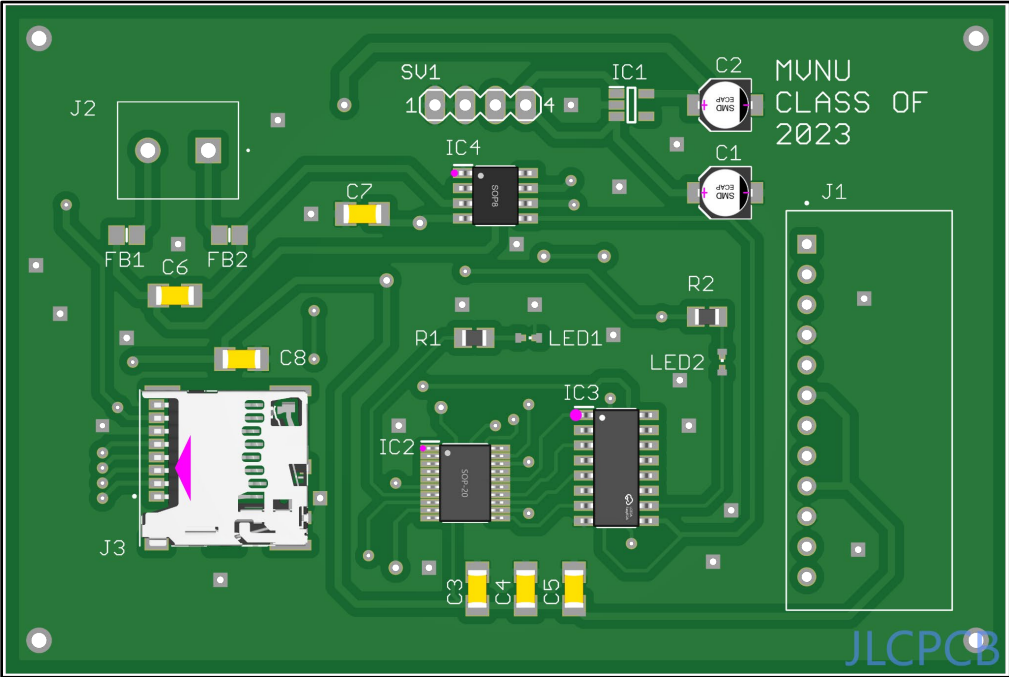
Custom PCB JLC PCB Rendering (Top)
